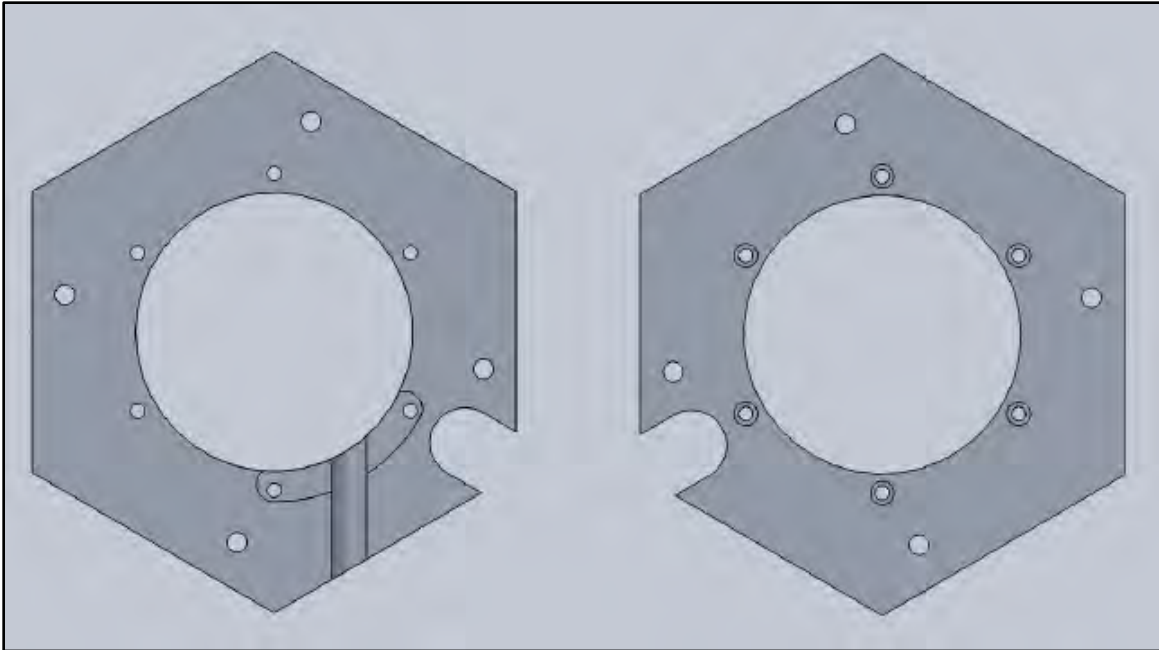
The mounting flange as seen from the back that will sit against the engine (left) and the front that will go against the throat (right).
